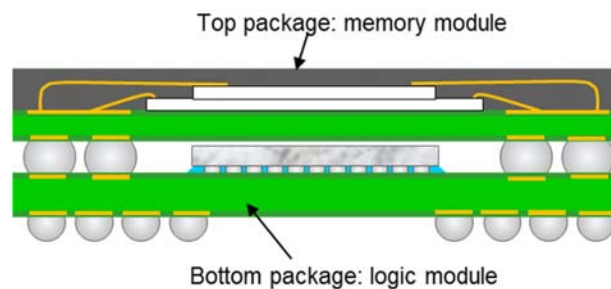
Schematic illustration of a typical Package-on-Package assembly
